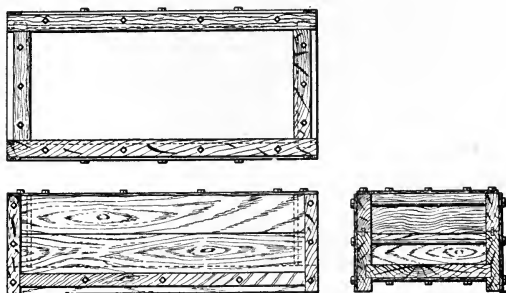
PLAN AND ELEVATIONS OF ACID TANK
